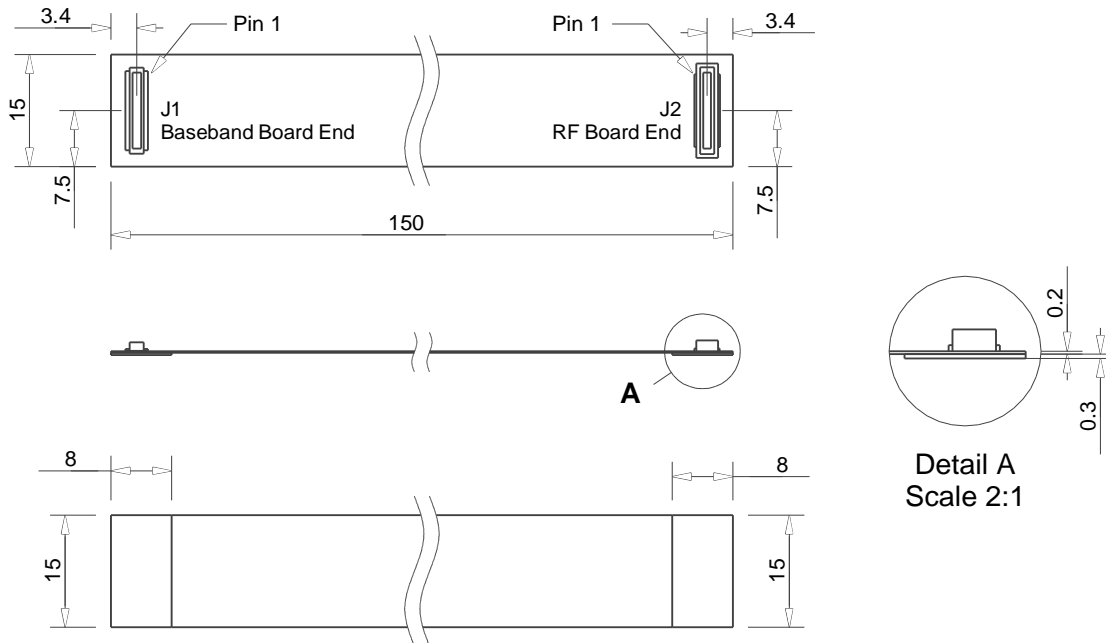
FPC Interconnect Cable Mechanical Dimensions
